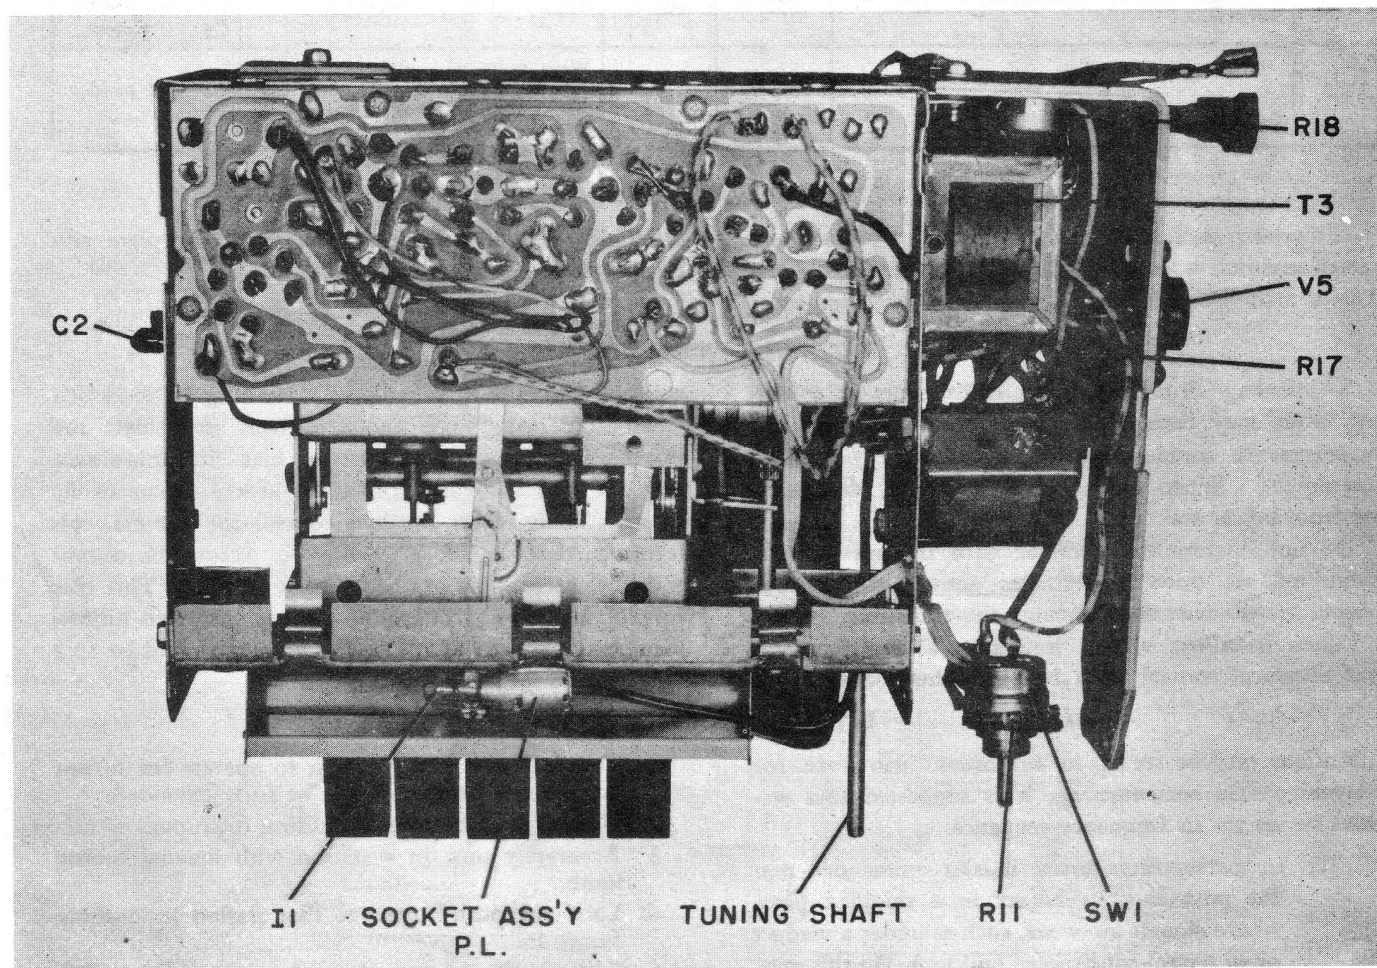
Bottom View of Philco Model P-5801, Showing Location of Parts
